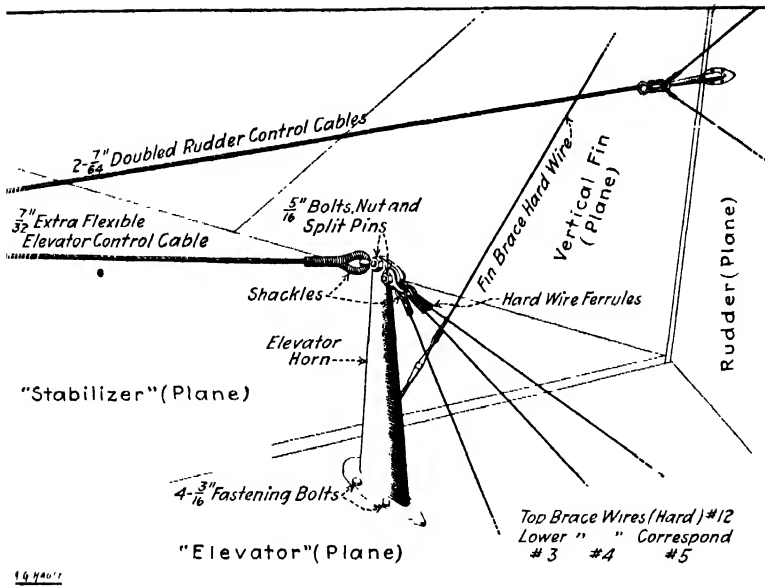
Control Pylon of Elevator Showing Wire Control Cable and Hard Wire Bracing.
